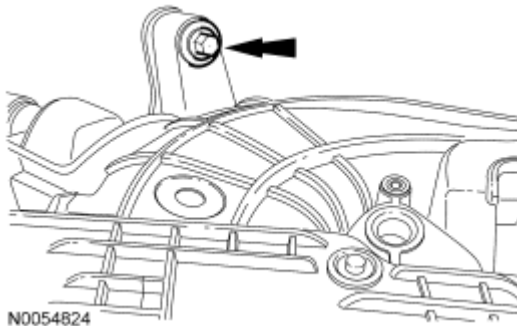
Locating Upper Intake Manifold Support Bracket Bolt
